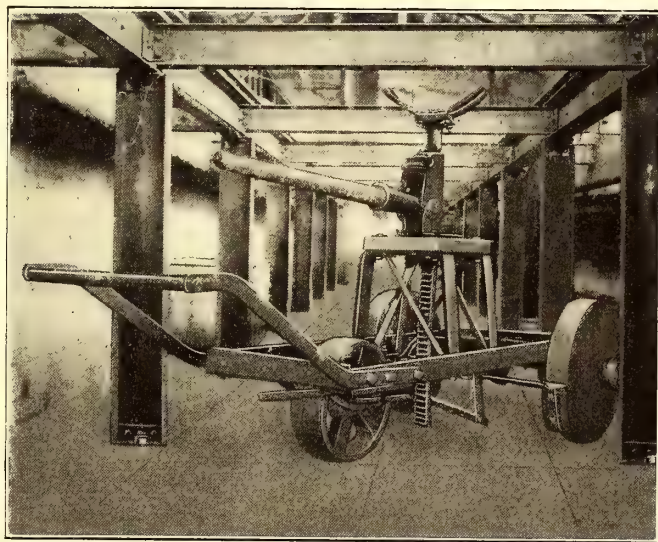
WAGON FOR HANDLING ARMATURES IN THE PIT
